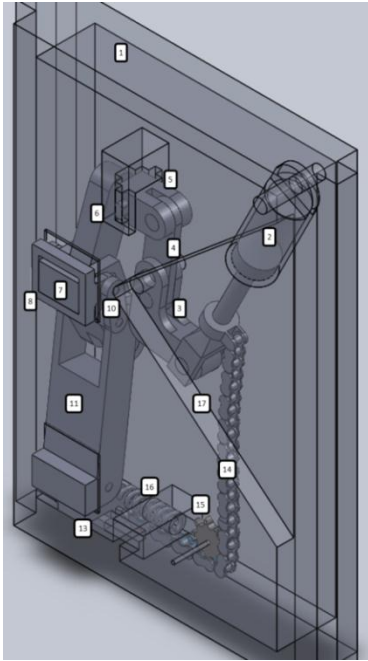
DETAILED 3D MODEL OF THE LOCKING HOOK, PAWL AND RETAINER BLOCK OF A CAGE ARRESTING DEVICE CONCEPT USING CONVEYANCE MOUNTED HYDRAULICALLY ACTUATED CLAMP BEAMS.
